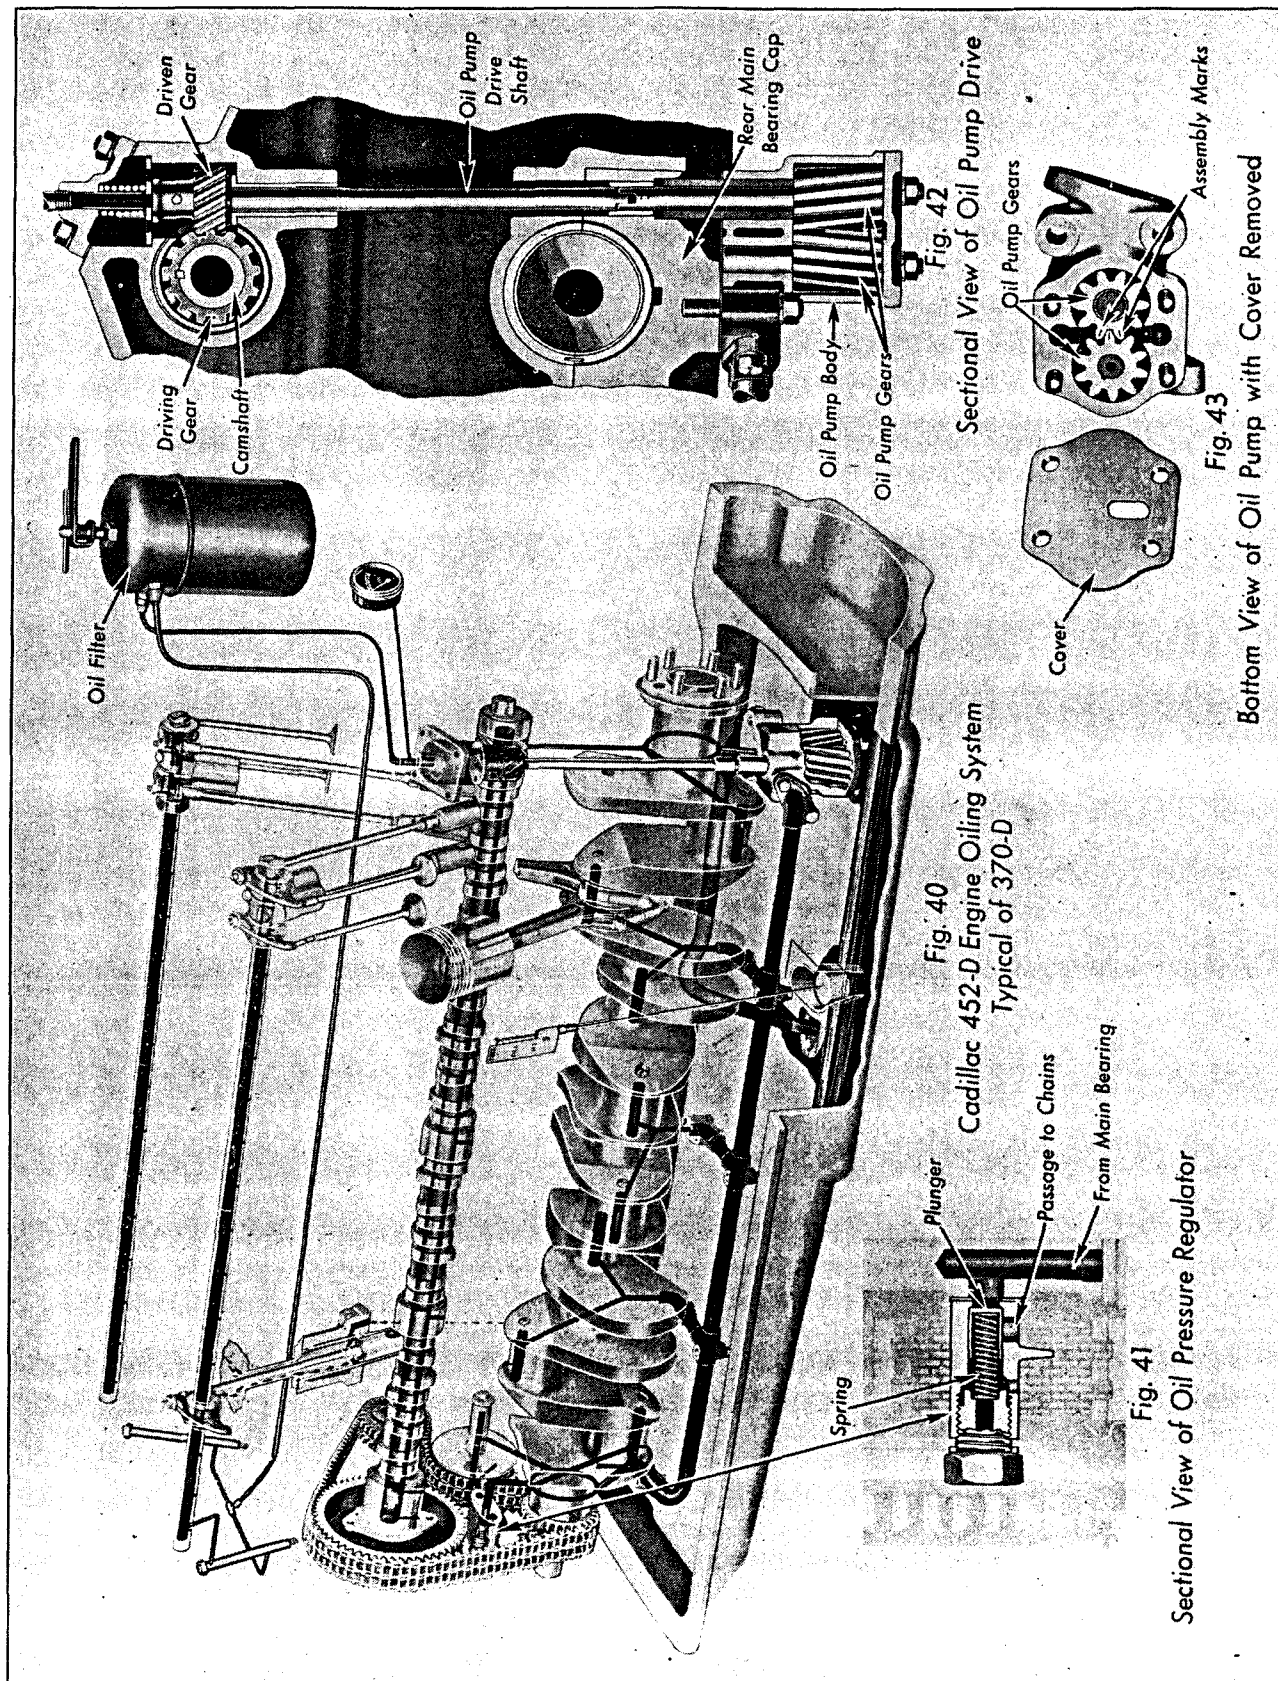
Oiling System—Cadillac 452-D. Typical of 370-D
